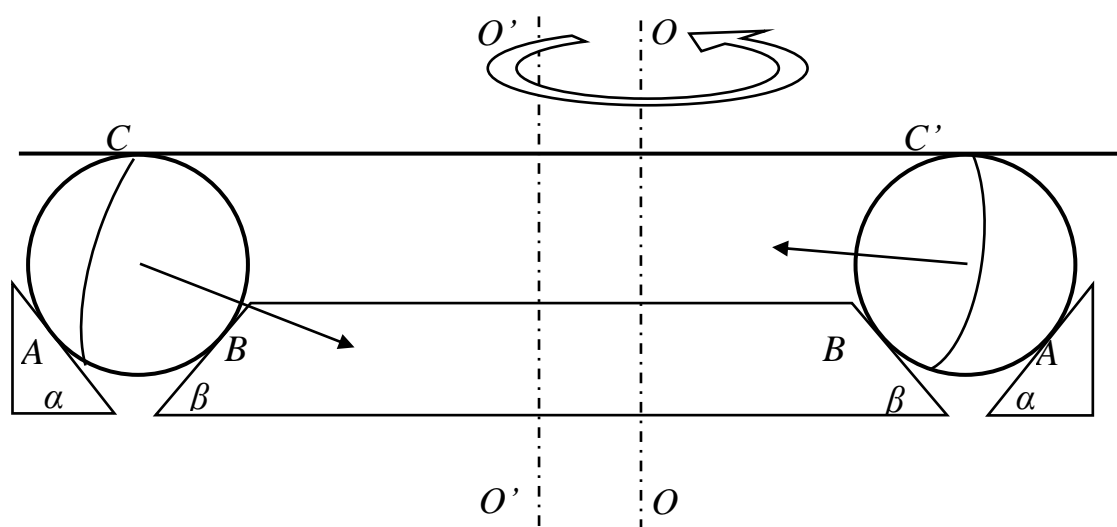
The contact trace shifting at point C of the eccentric V-groove grinding mechanism
